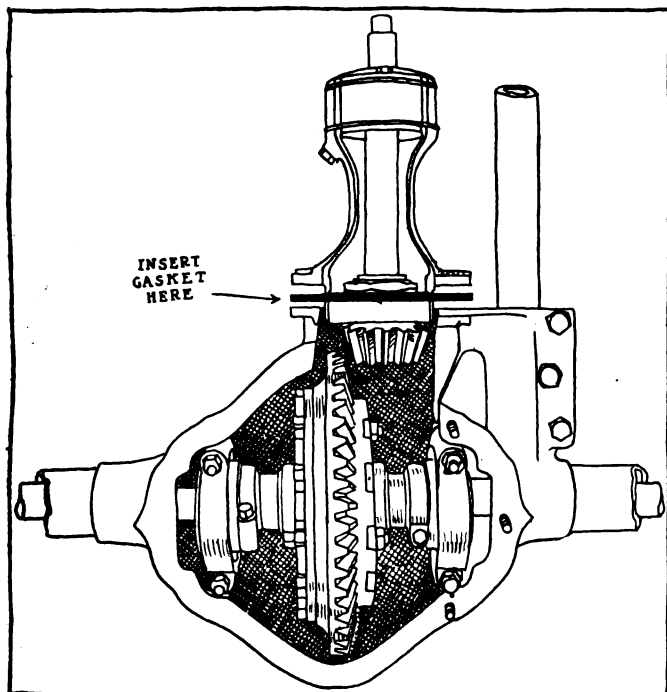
Where the gasket should be inserted to bring gears into mesh
